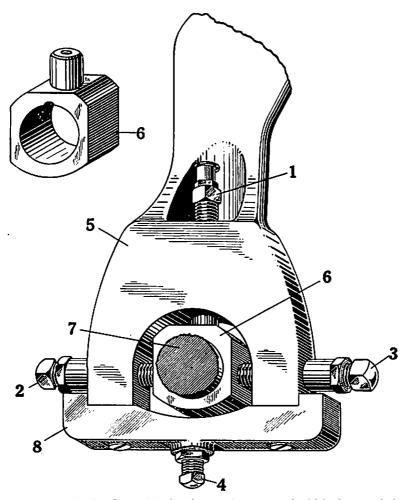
Showing the Pot Leg Adjusting Screws, by means of which the mouthpiece is aligned with the mold. This view also shows the oil cup applied to the upper adjusting screw I. A hole drilled through the screw conducts the oil to a hole in the shank of bushing 6. A groove is machined in the bushing to distribute the oil, thereby insuring lubrication for the entire bearing surface of the bushing.
